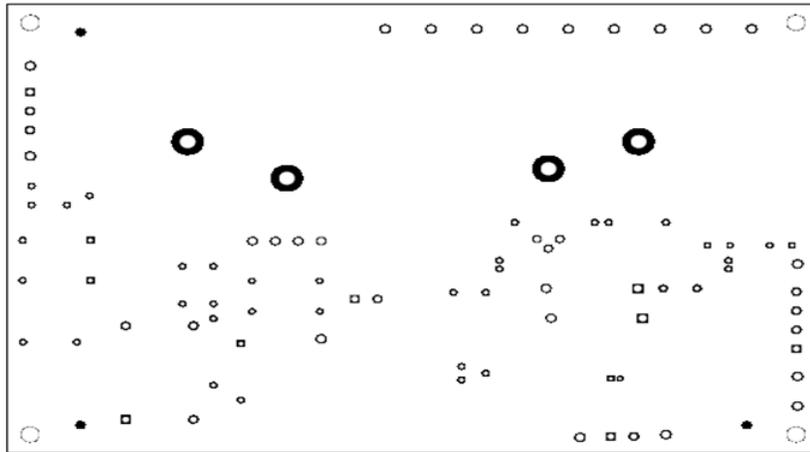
UCC28056BEVM-296 Top Copper Assembly Drawing (Top view)
